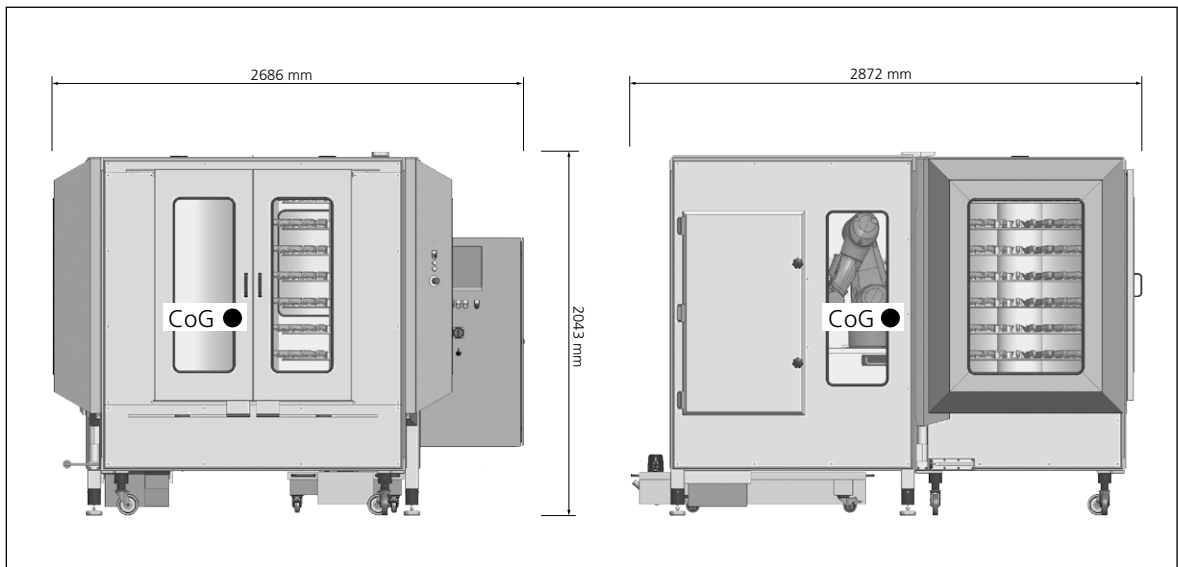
Dimensions in mm and center of gravity (CoG) of the machine
